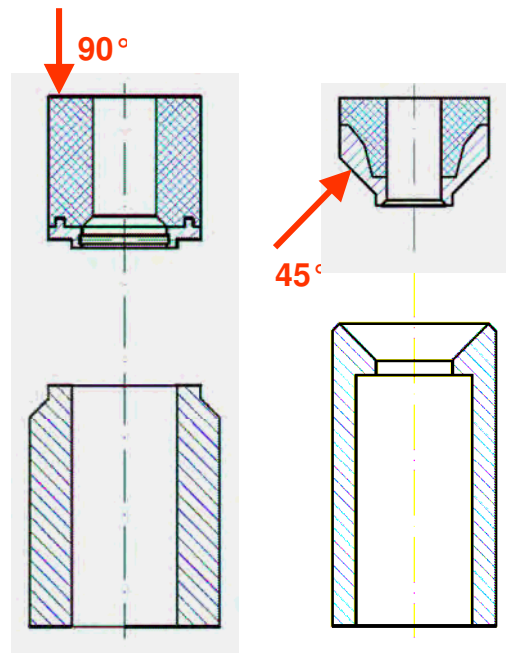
Cross section of a typical tulip and marked position of Ultrasound beam direction.
